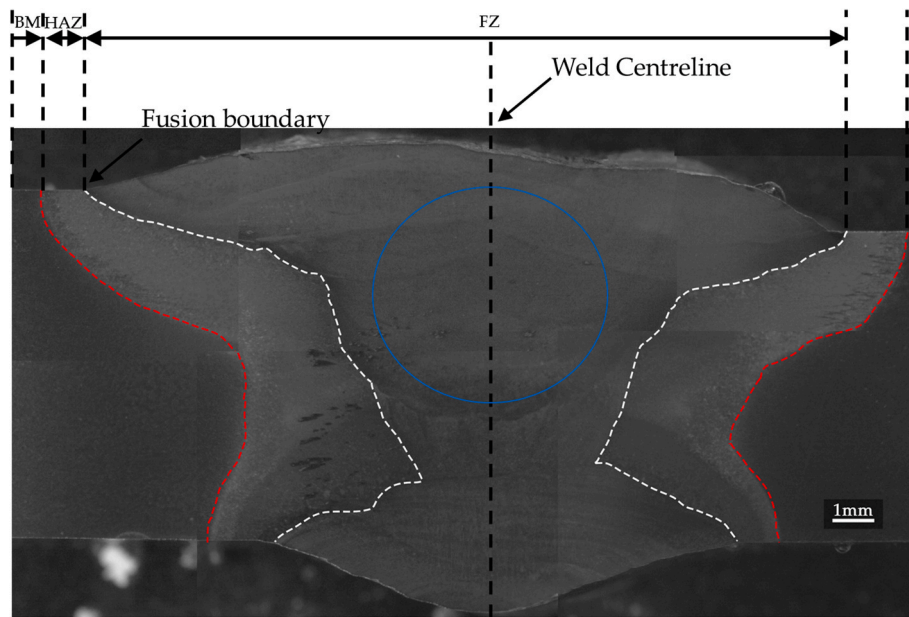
Optical micrographs showing an overall view of the cross-section of the GTAW weldments. *the Blue circle indicates the dilatometric sample extraction zone.
